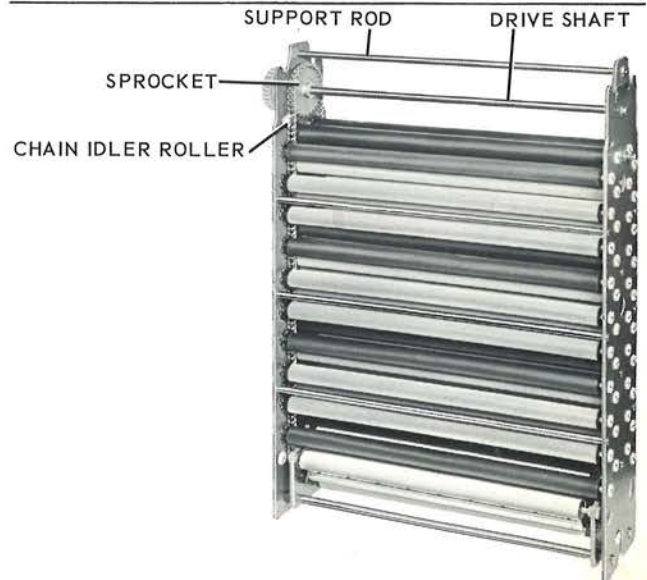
RACK ASSEMBLY (INSIDE DRIVEN SIDE)
